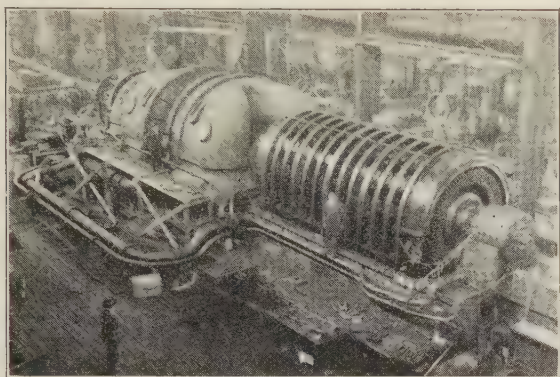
SHOP VIEW OF 59,000-KV-A., 1800-REV. PER MIN. STEAM TURBINE-ALTERNATOR UNIT SHOWING SKELETON FRAME CONSTRUCTION
